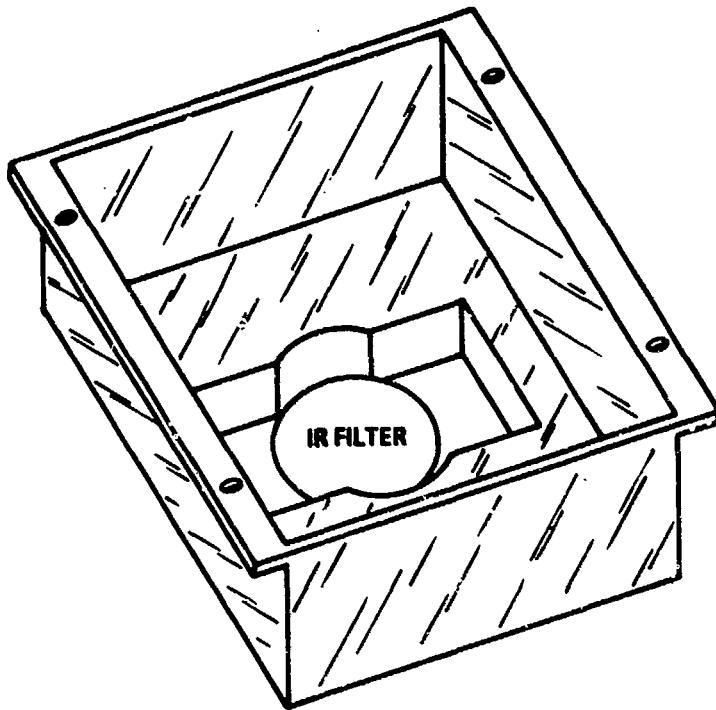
"Inverted top hat" cold-shield fixture for mounting layered-dielectric IR filter.
